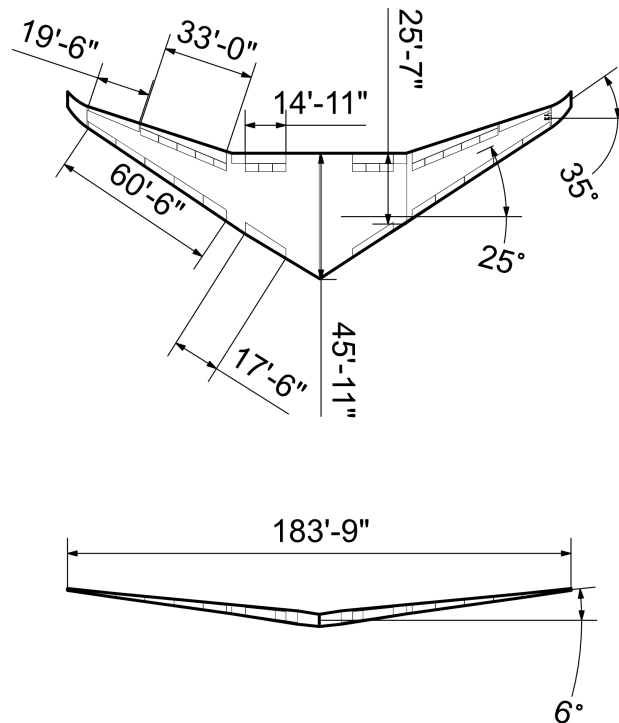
Top and front drawing with major wing dimensions, along with flap layouts
